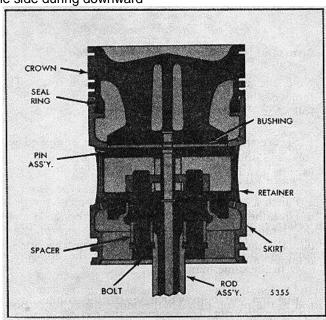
Cross-Head Piston and Connecting Rod Assembly
